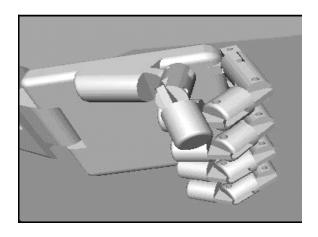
Gripper for catching bodies with cylindrical shape.
